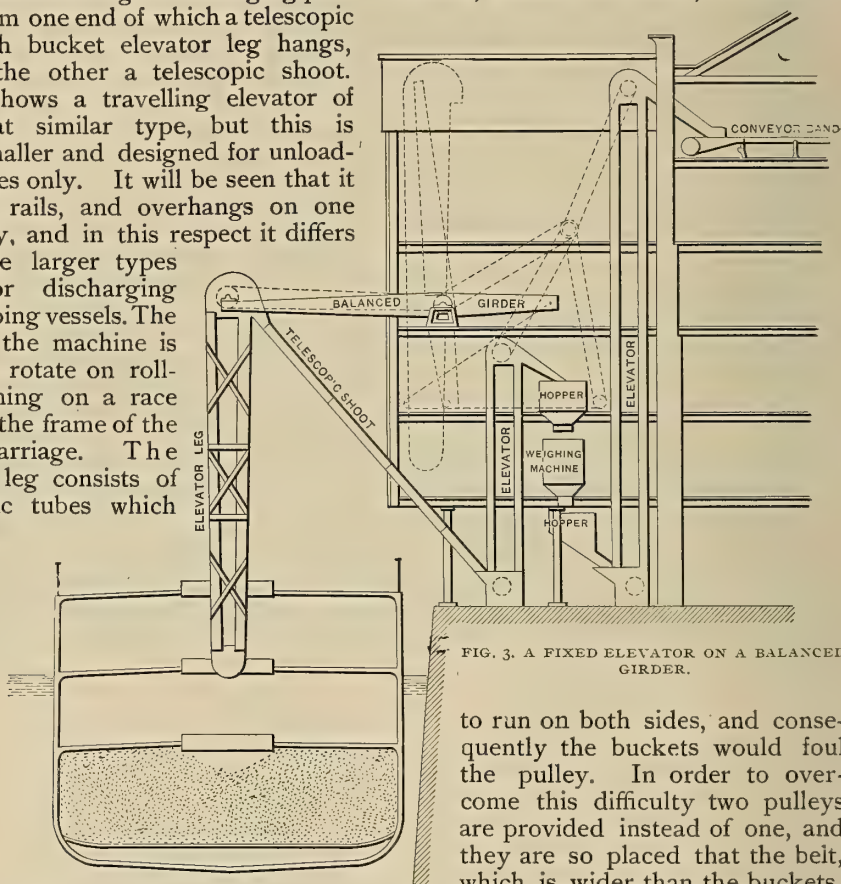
A FIXED ELEVATOR ON A BALANCED GIRDER.
